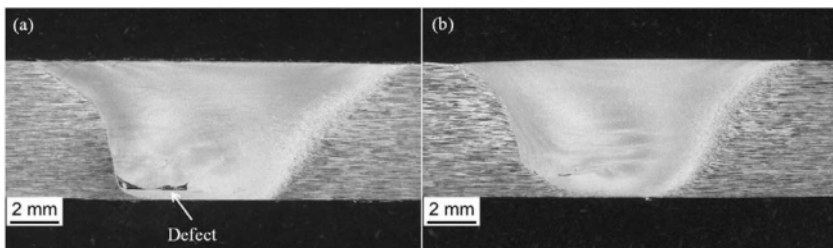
Macrographs of the weld nuggets processed with two pin designs: (a) flat step spiral pin; (b) rounded step spiral pin.
